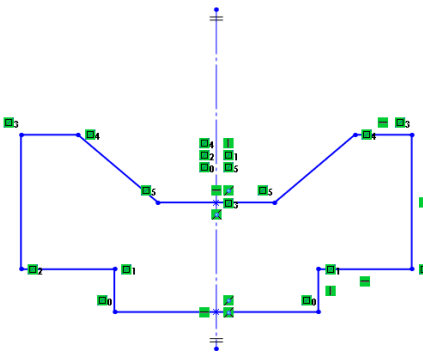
Complete sketch drawn using the *Dynamic Mirror Entities* tool
